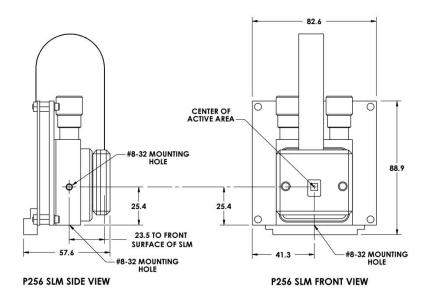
~ Outline drawing of the 256x256 SLM. Dimensions in millimeters.
